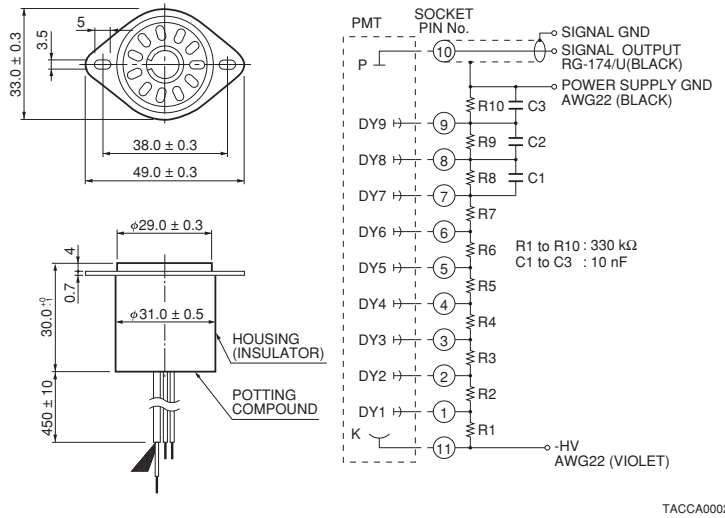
D-type socket assembly (Unit: mm) Sold separately
